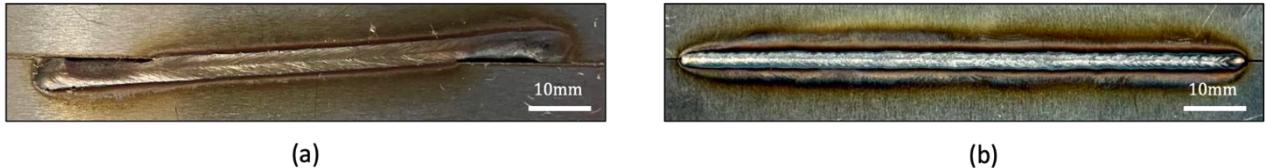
(a) Weld defect due to misalignment between the laser beam and the welding seam; (b) a good-quality weld along the same trajectory.
